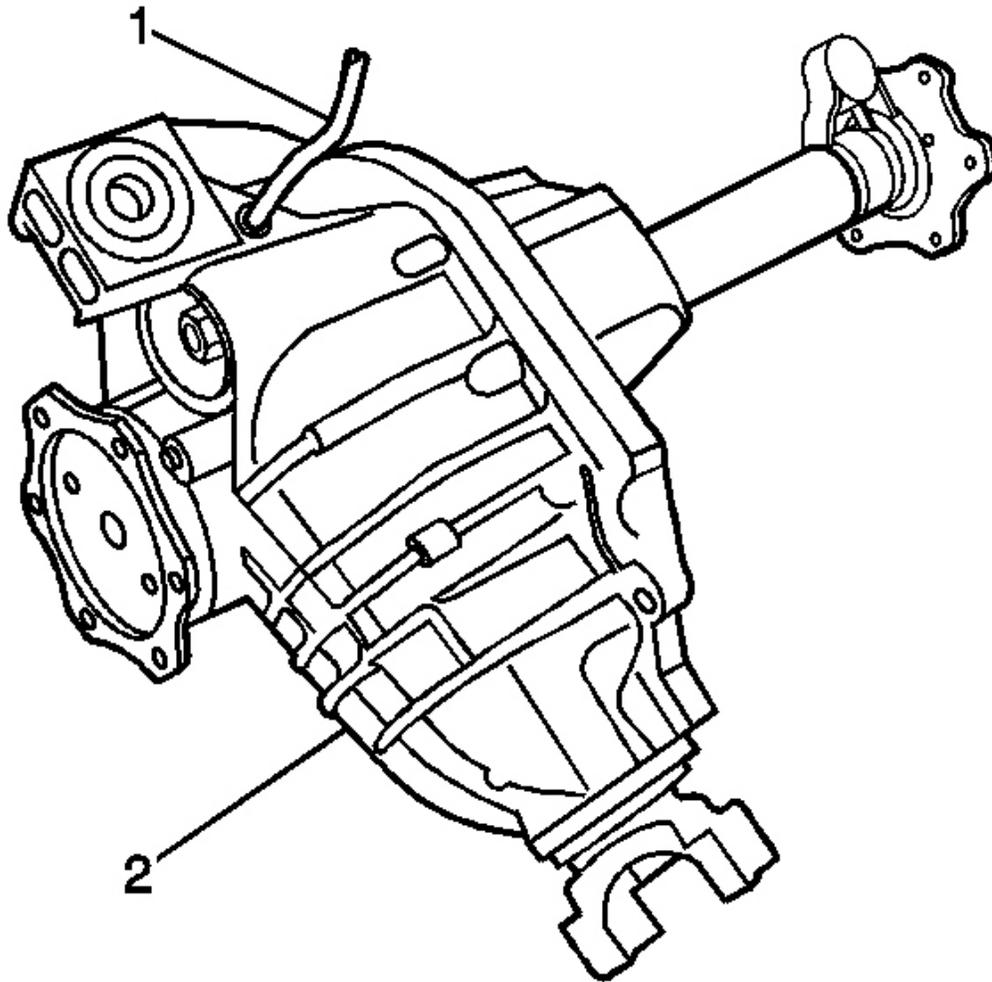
Identifying Vent Hose & Differential Carrier Case Assembly
